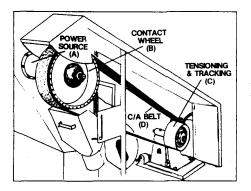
Parts required to operate a coated abrasive (C/A) belt.
